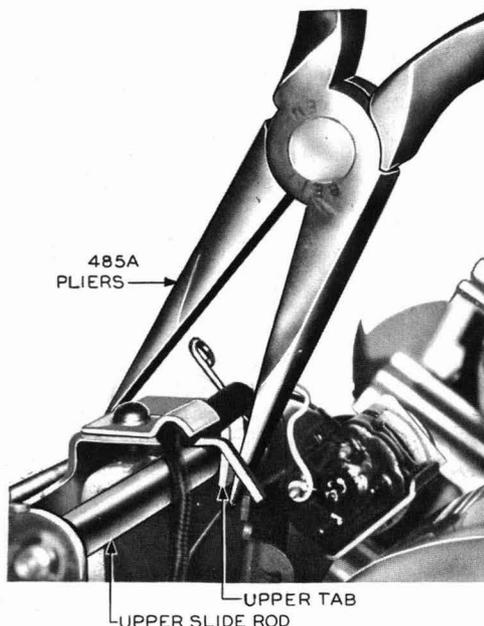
Method of Adjusting Upper Tab for Minimum Clearance
